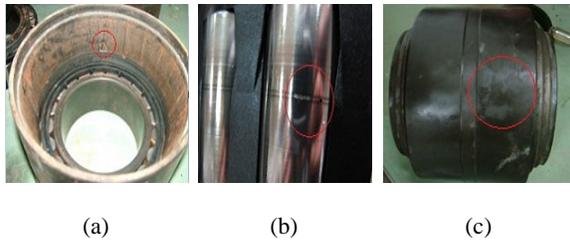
Three kinds of typical damage photos of roller bearings: (a) Surface damage of the inner ring; (b) Roller electrical erosion; (c) Outer ring stripping injury
